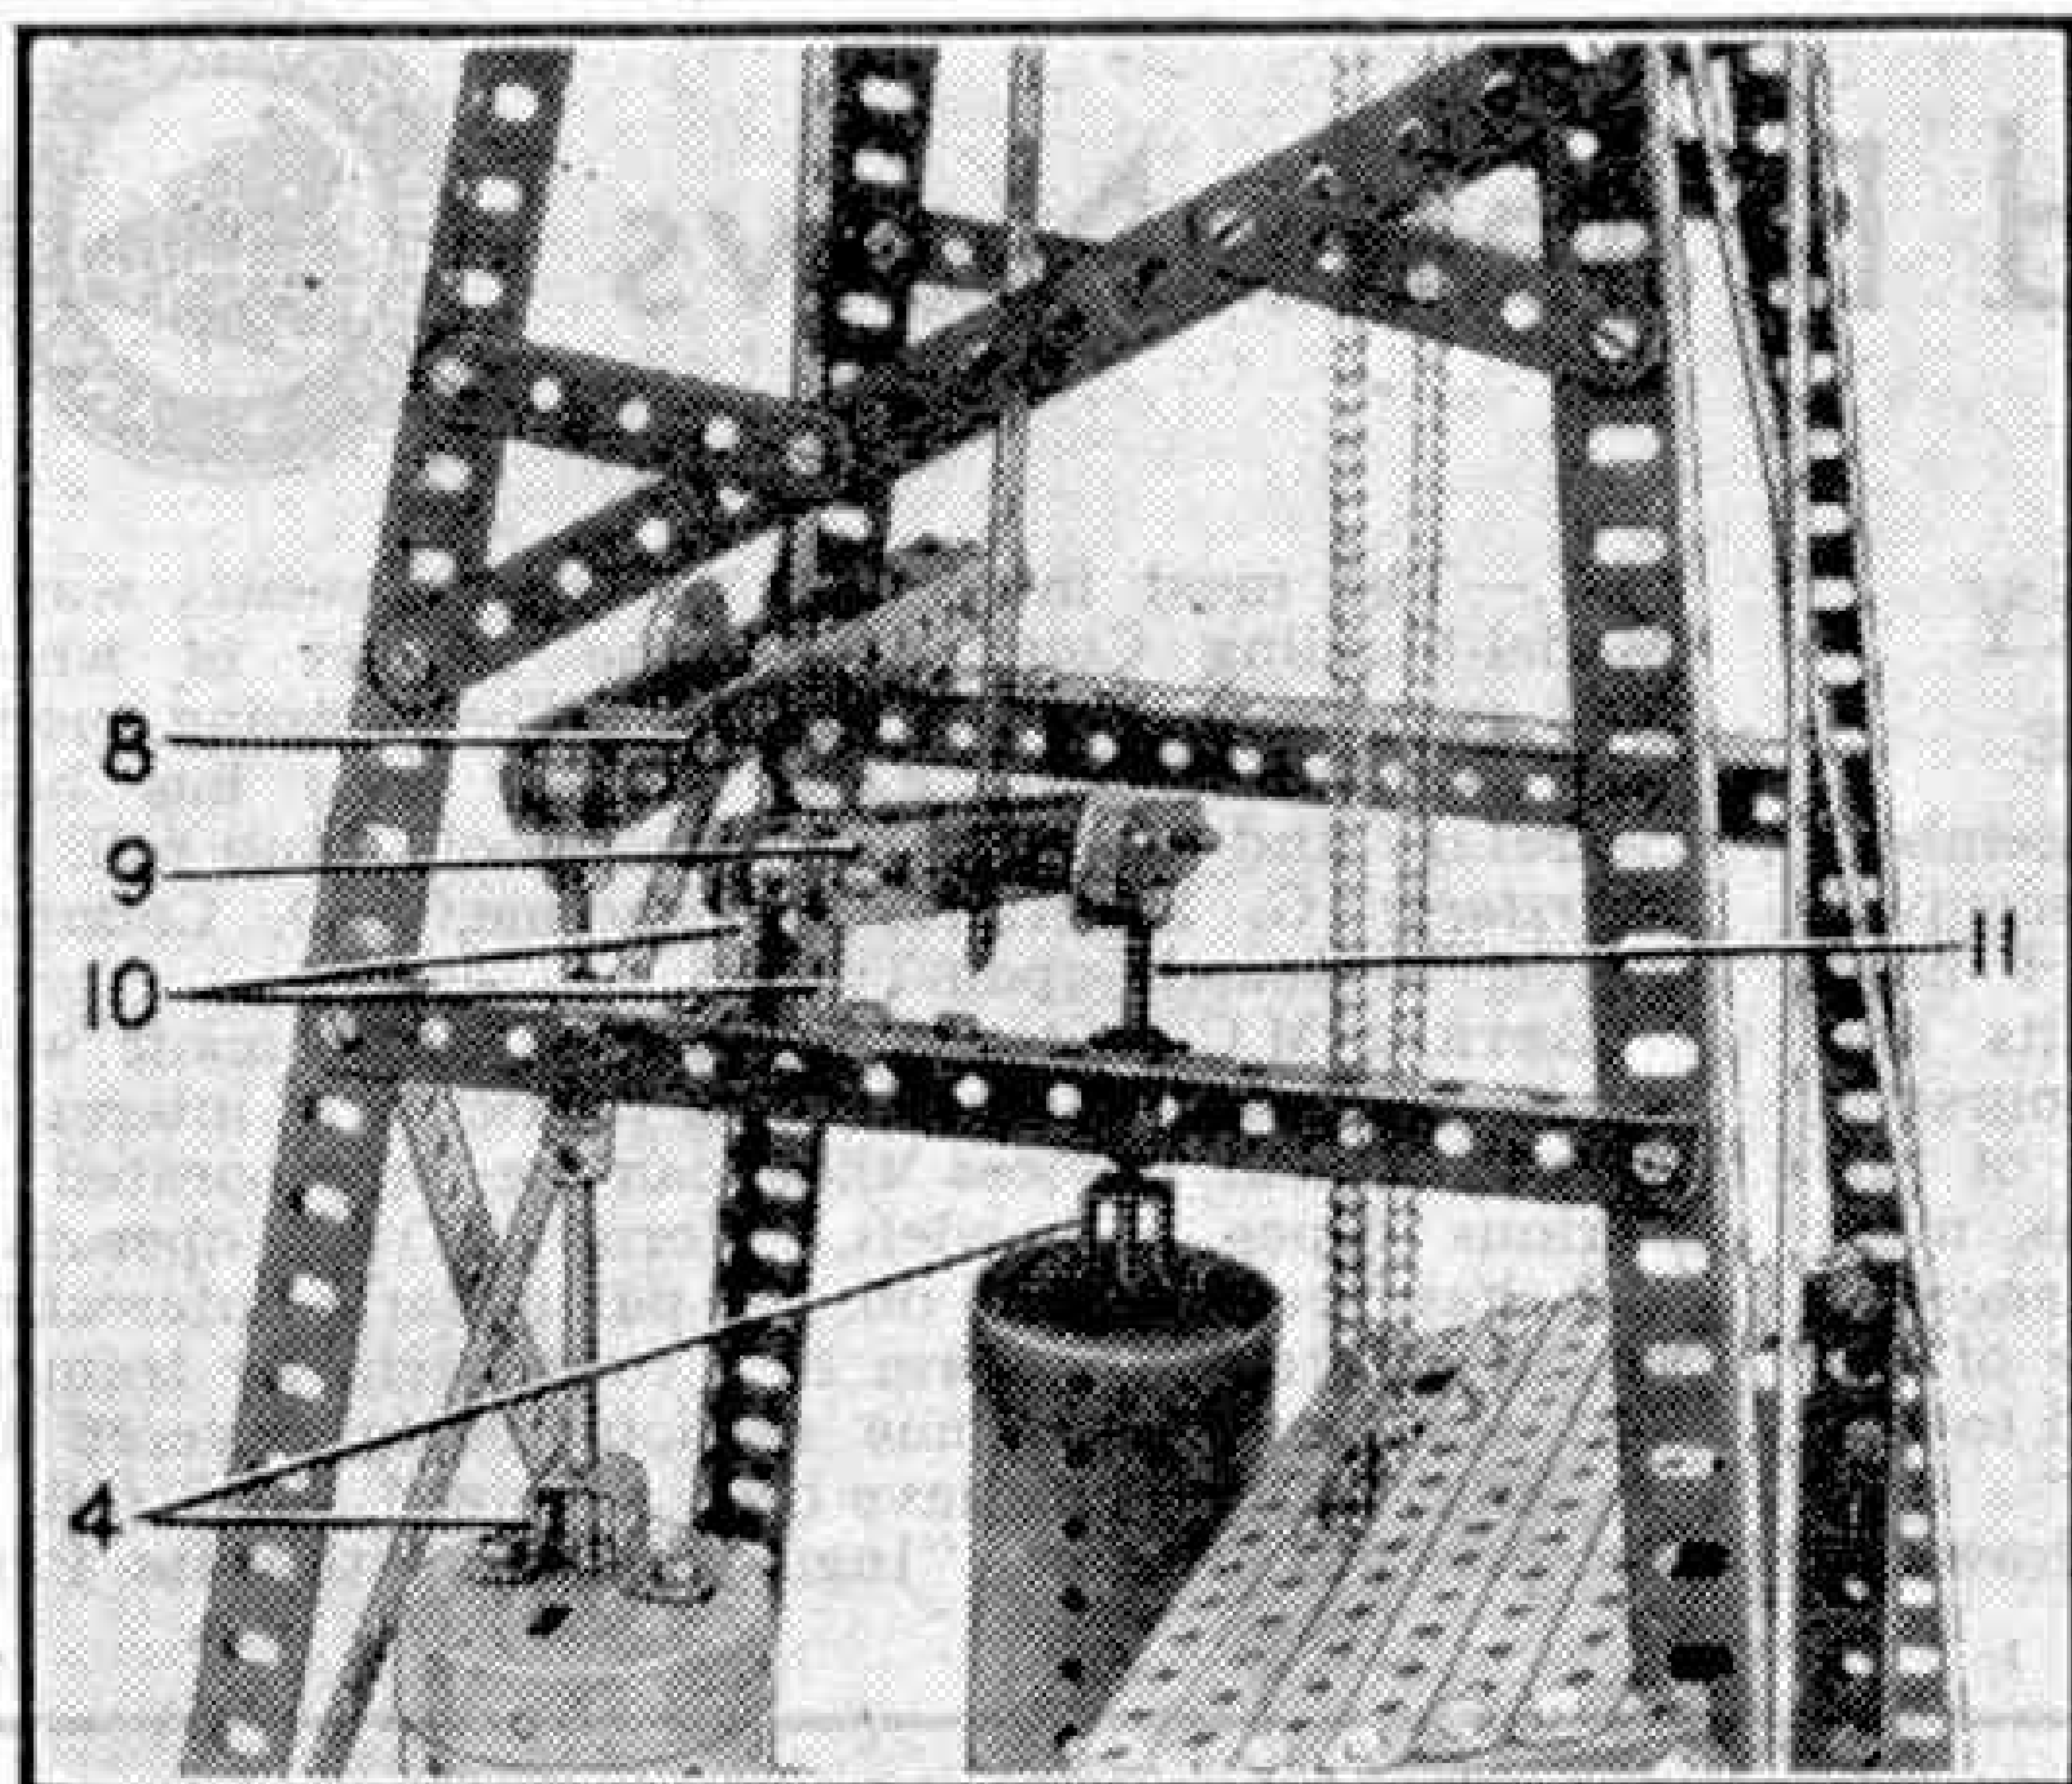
A close-up showing the details of the pumping gear crossheads.
